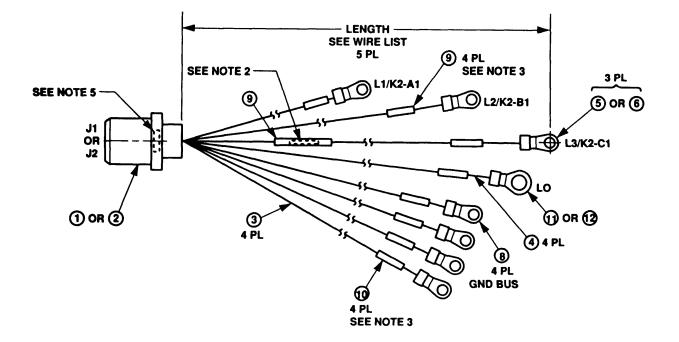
Switch Box Power Wiring Harness W17 amd W18 (Sheet 1 of 2).
